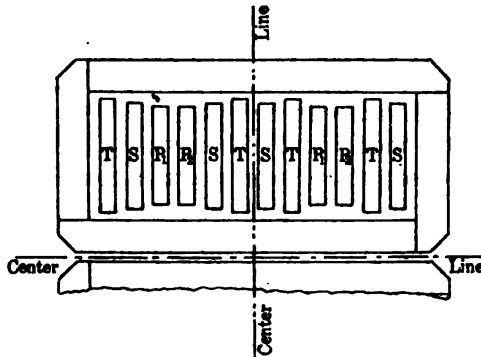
PARTIAL SECTION THROUGH SHELL-TYPE TRANSFORMER SHOWING DISPOSITION OF WINDINGS
